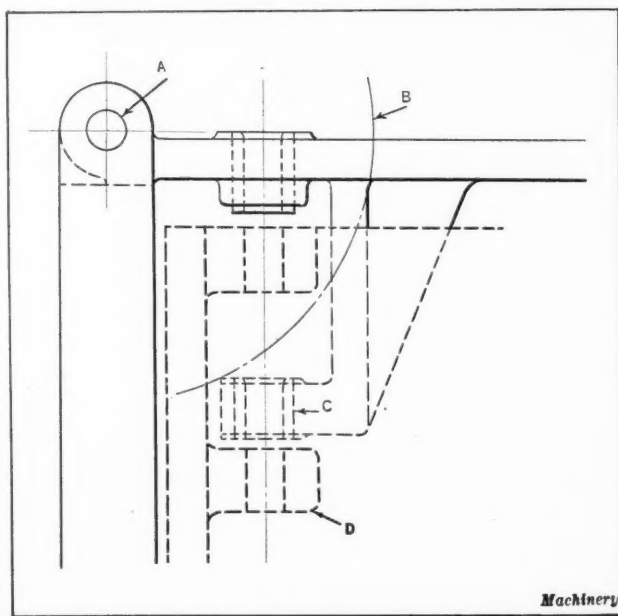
Drill Jig Cover with Special Bushing Arrangement
